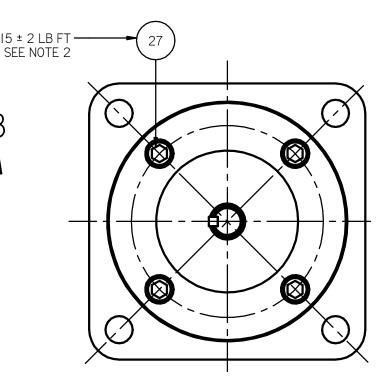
STEEL CASE C-FACE MOUNT EIC ASSEMBLY
